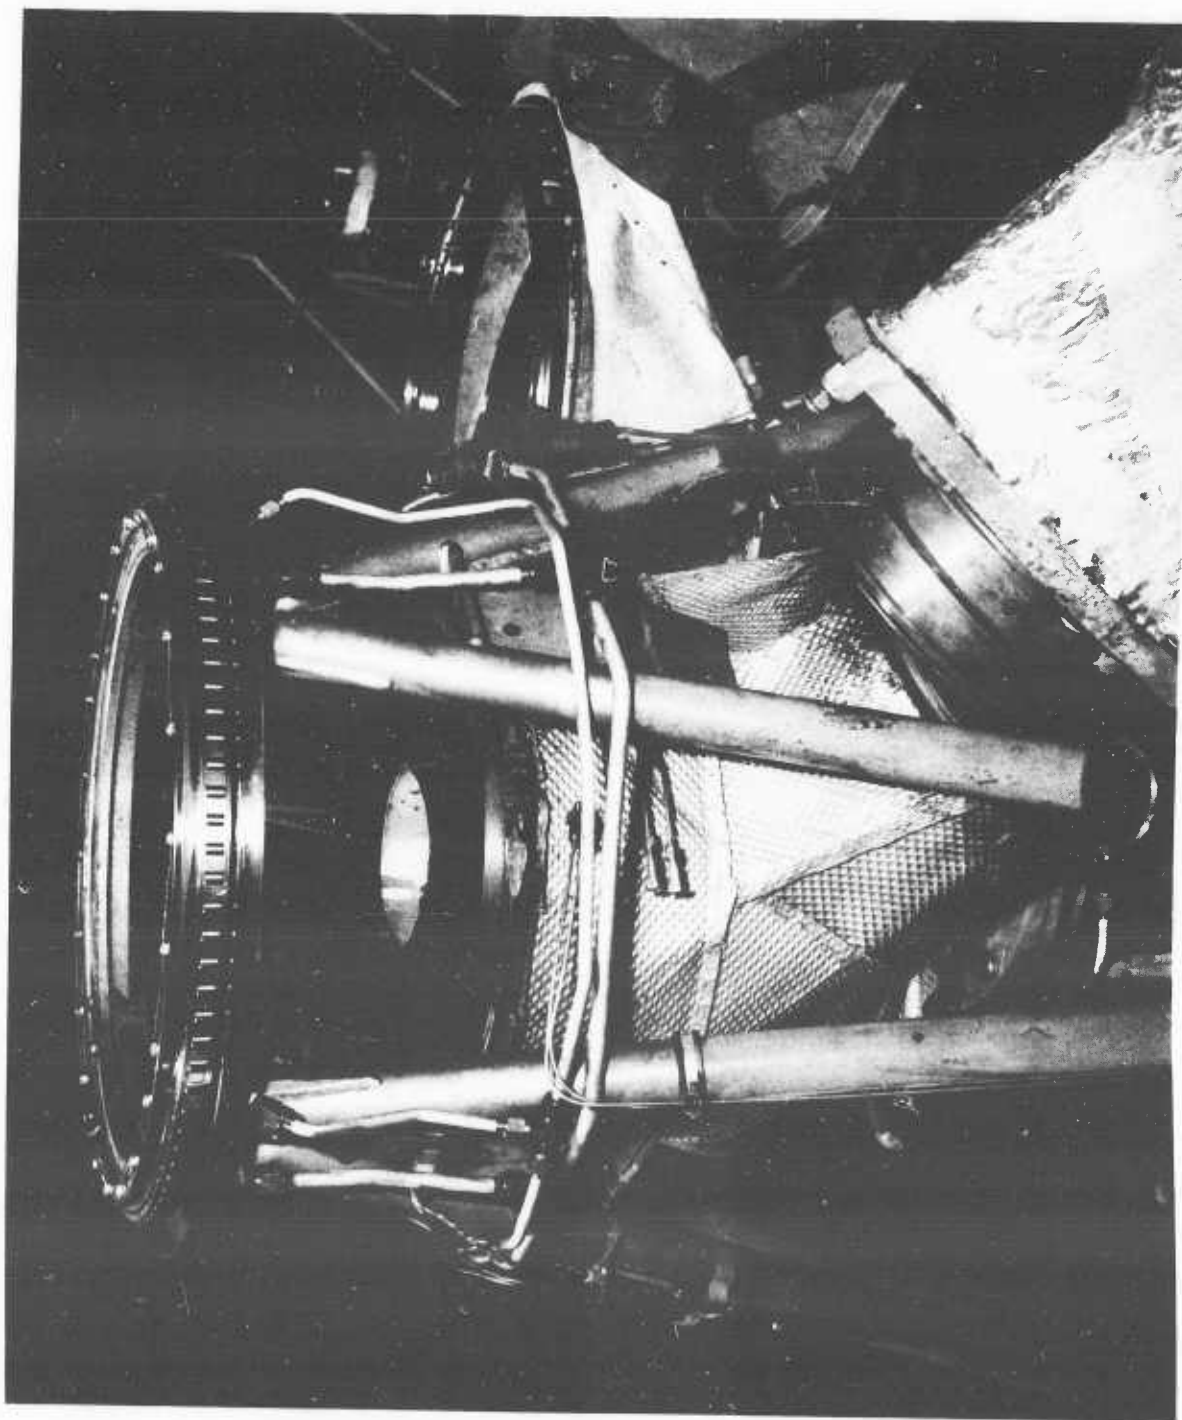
Hub Upper Radial Bearing and Seals Disassembled After 18 Hours.
